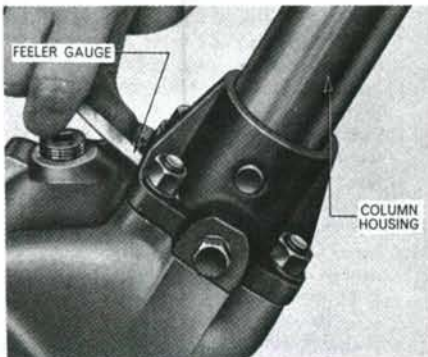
Measuring clearance between gear housing and steering column housing to determine shim and gasket thicknesses needed. Shim and gasket thickness required between gear housing and side cover is determined in similar manner.
